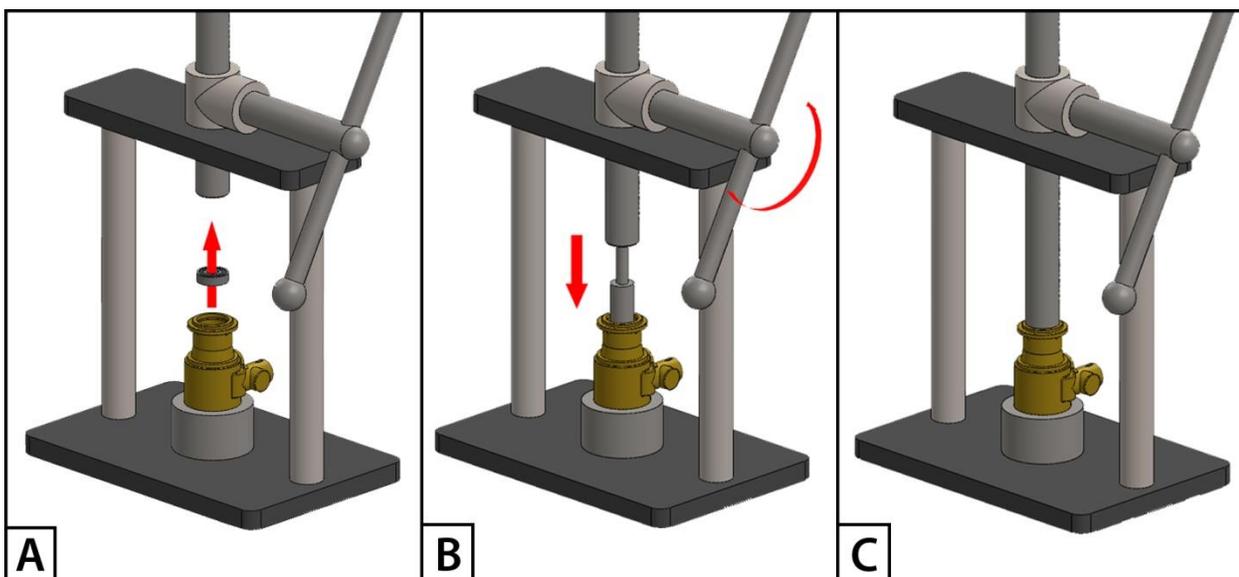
Diagram illustrating the tasks required to carry out Step 2.3.
